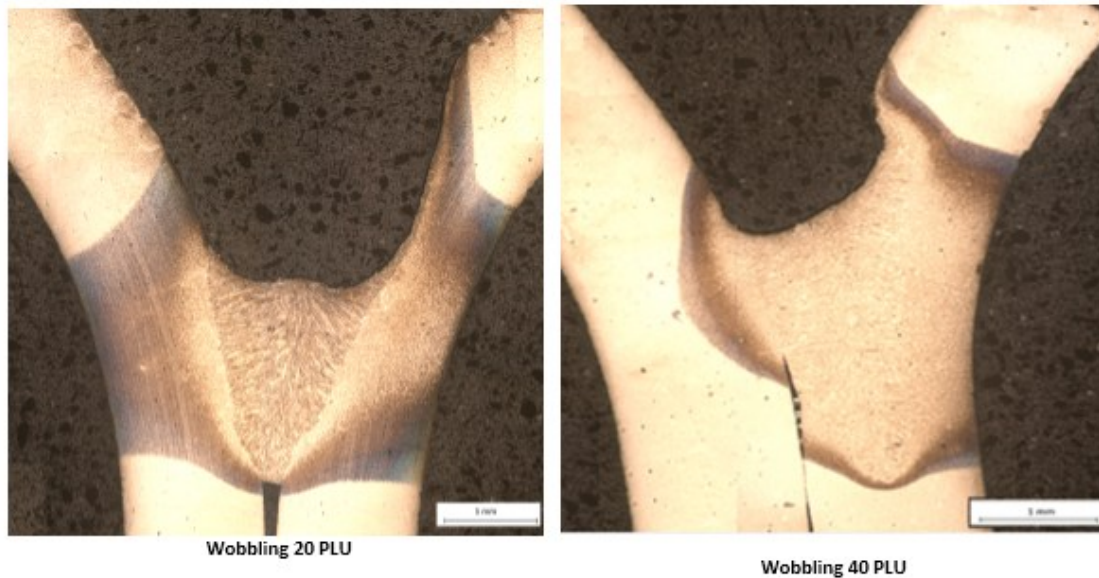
Flanged joints wobbling test, P=3Kw, V= 30 mm/s
